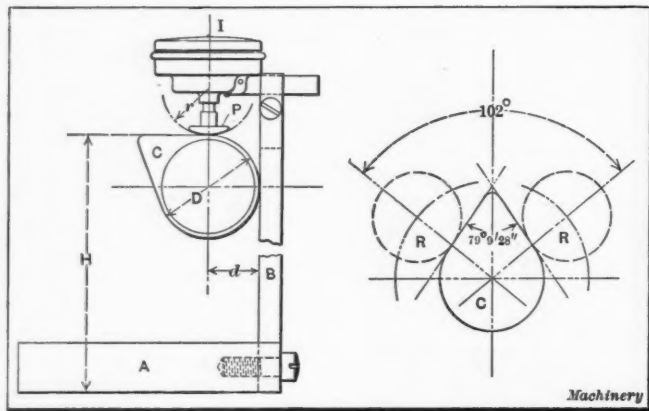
Method of using Dial Test Indicator for inspecting Gas Engine Cams
